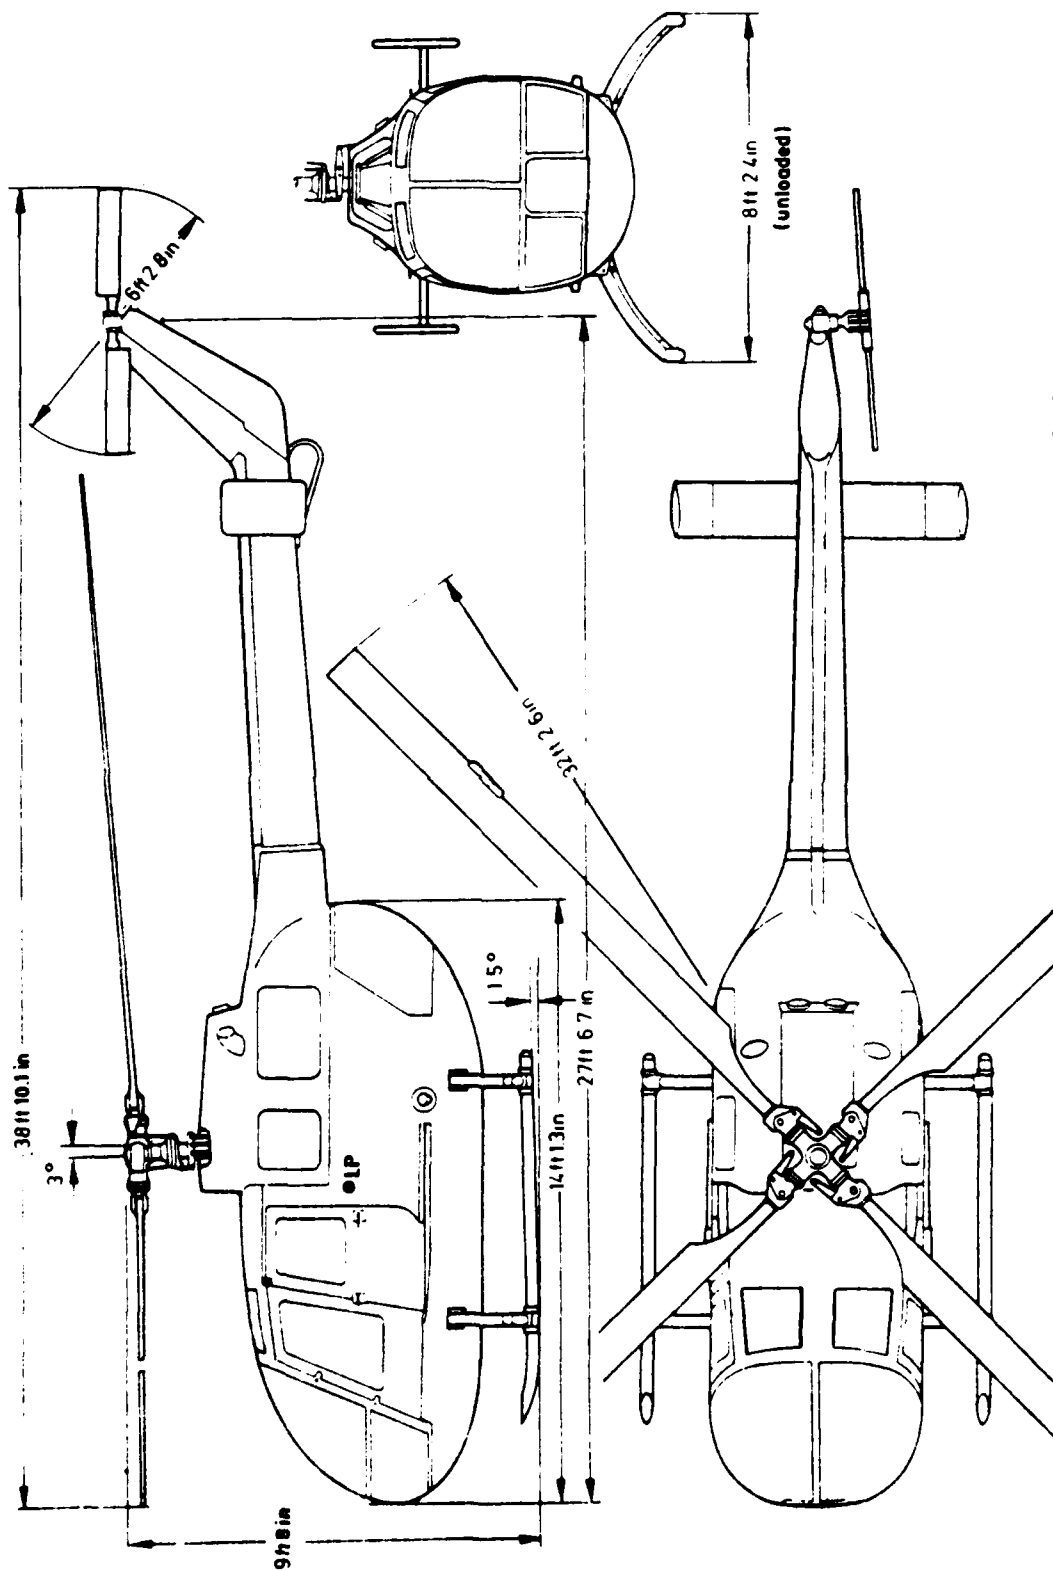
BO-105 THREE-VIEW DRAWING.
